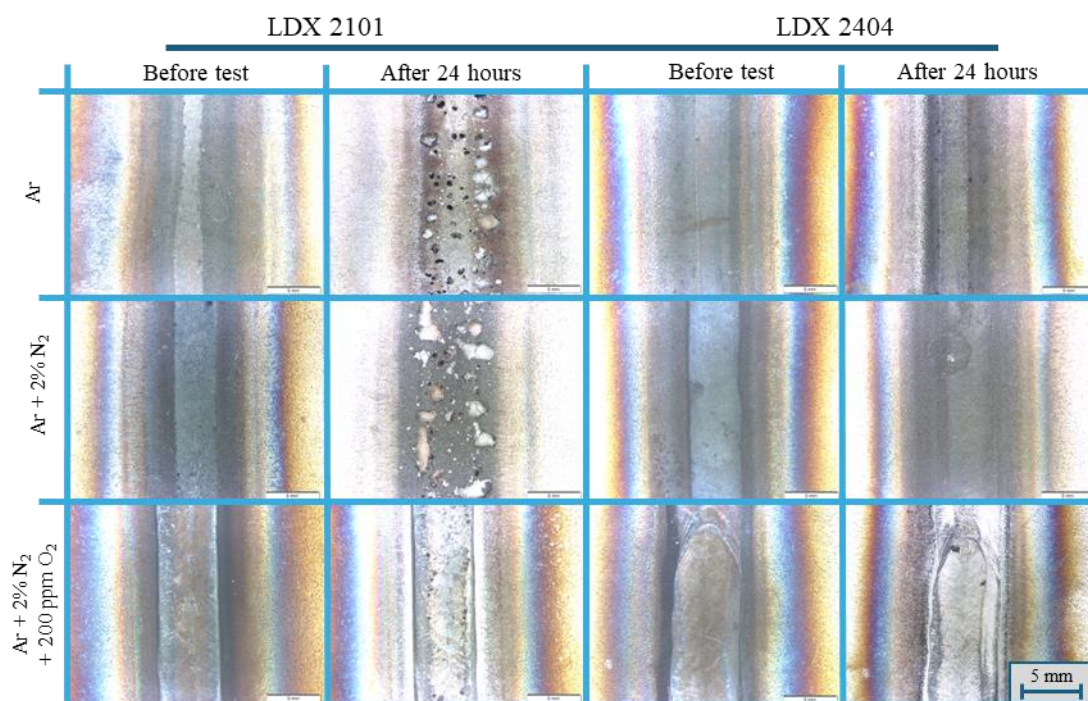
The face side of the welds, welded with 0.53 kJ/mm arc energy, before the corrosion test and after 24 hours immersion in 6% FeCl₃ solution
